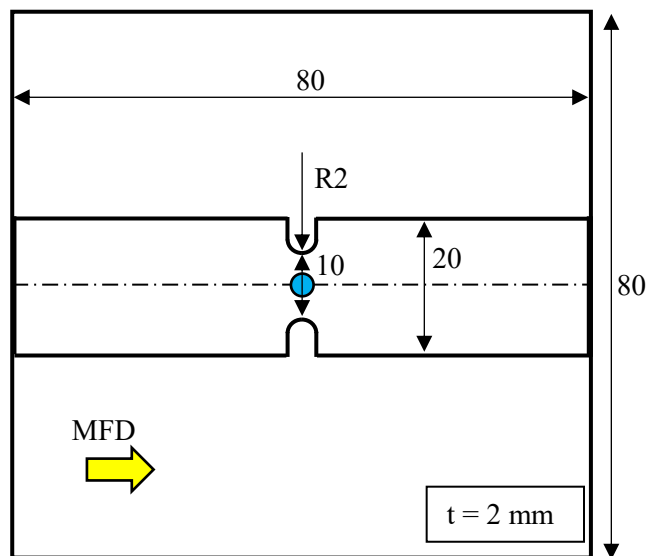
Geometry N/C. Specimen and plate dimensions.
